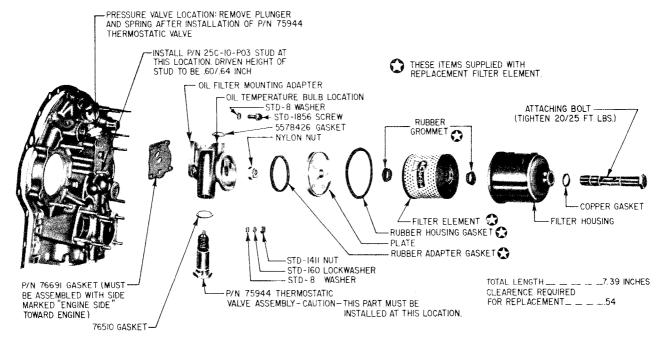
Exploded View of Full-Flow Oil Filter Assembly
